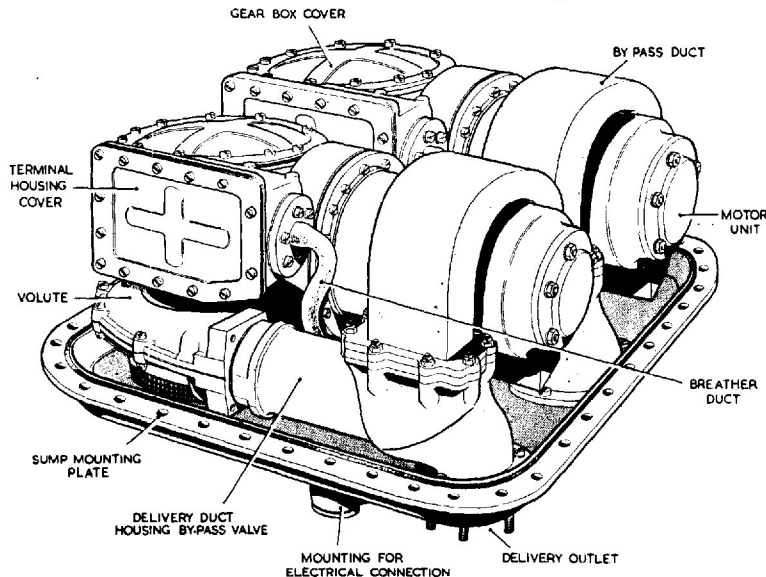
Typical twin base sump mounting fuel booster pump assembly
